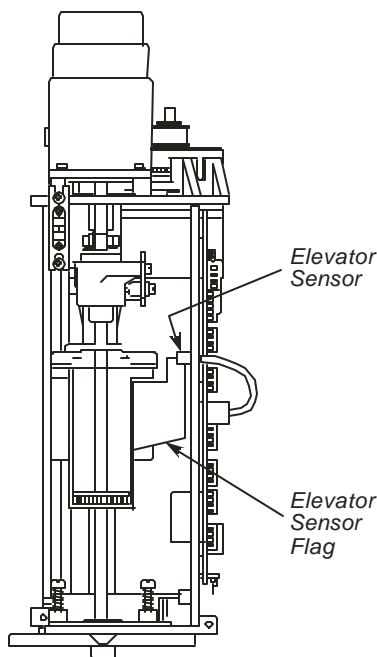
21 Elevator Sensor Flag and Elevator Sensor.
